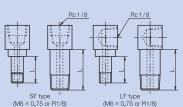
Grease fitting and tube fitting Standard lubrication accessory is B type.
